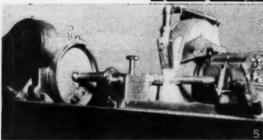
The piston rod with head attached is put into the grinder for refinishing. Fig. 4—Refinishing air pump piston rods. Fig. 5—The milling machine arbor shown in the machine was finished within 0.0001 in. of size by a twoyear apprentice.
